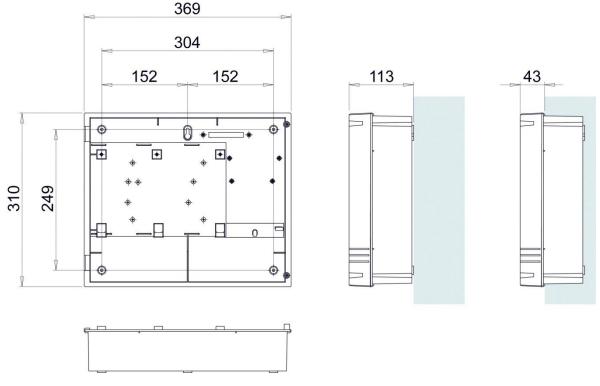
Plan view inside the enclosure without PCBs. Side view for surface installation. (Dimensions: mm)
